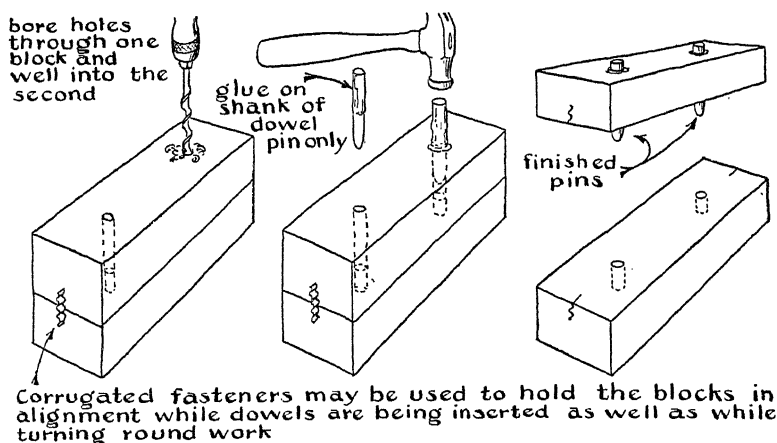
Sand casting. Method of using wooden dowels to hold the two halves of the pattern in alignment.
